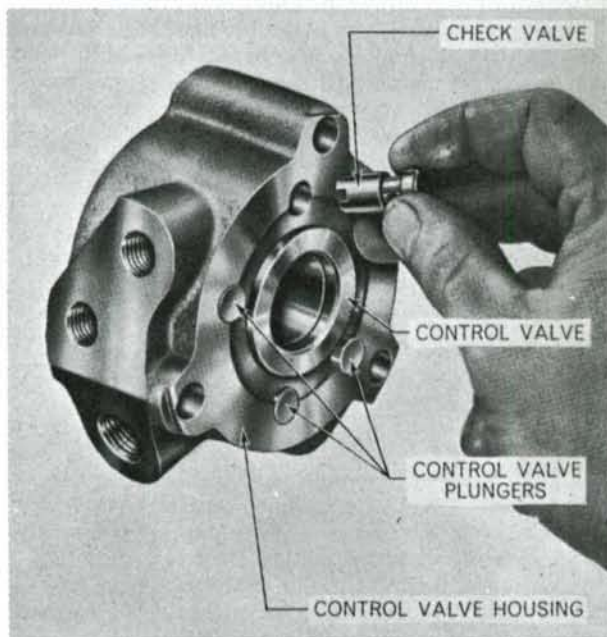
View showing upper side of control valve and spool assembly; install the three sets of control valve plungers and springs and the two check valves in the bores in housing as shown.
